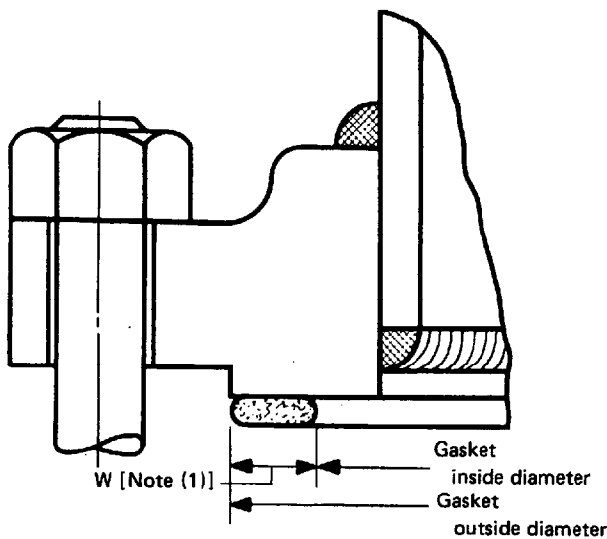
³ LARGE TONGUE WIDTH GASKET WITH GASKET OUTSIDE DIMENSION EQUAL TO O.D. OF RAISED FACE
